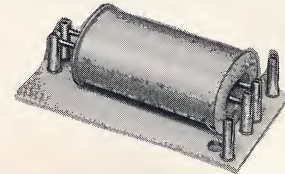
102PC assembly before encapsulation. The rugged terminal posts extend through the Epoxy board to provide the terminal pins shown in Fig. 3 below. The reed support leads are not bent but soldered to the rigid terminal posts with capsule and coil in position. The leads are not subjected to stresses that transmit to the reeds inside the capsule and disrupt adjustment stability.
